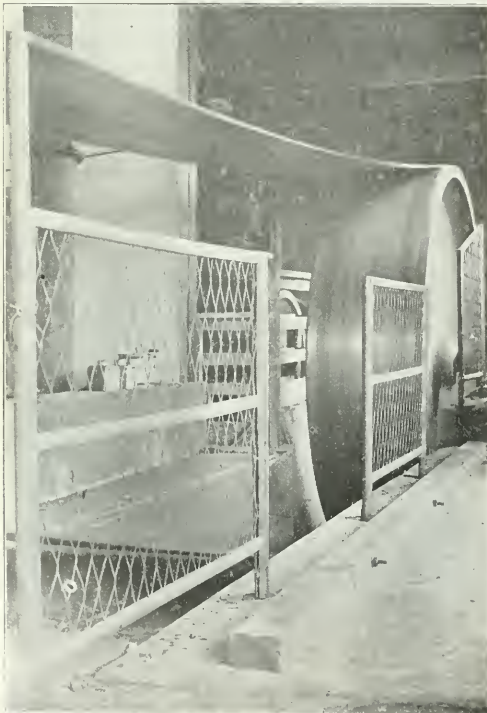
WELDED PIPE USED AS GUARD
